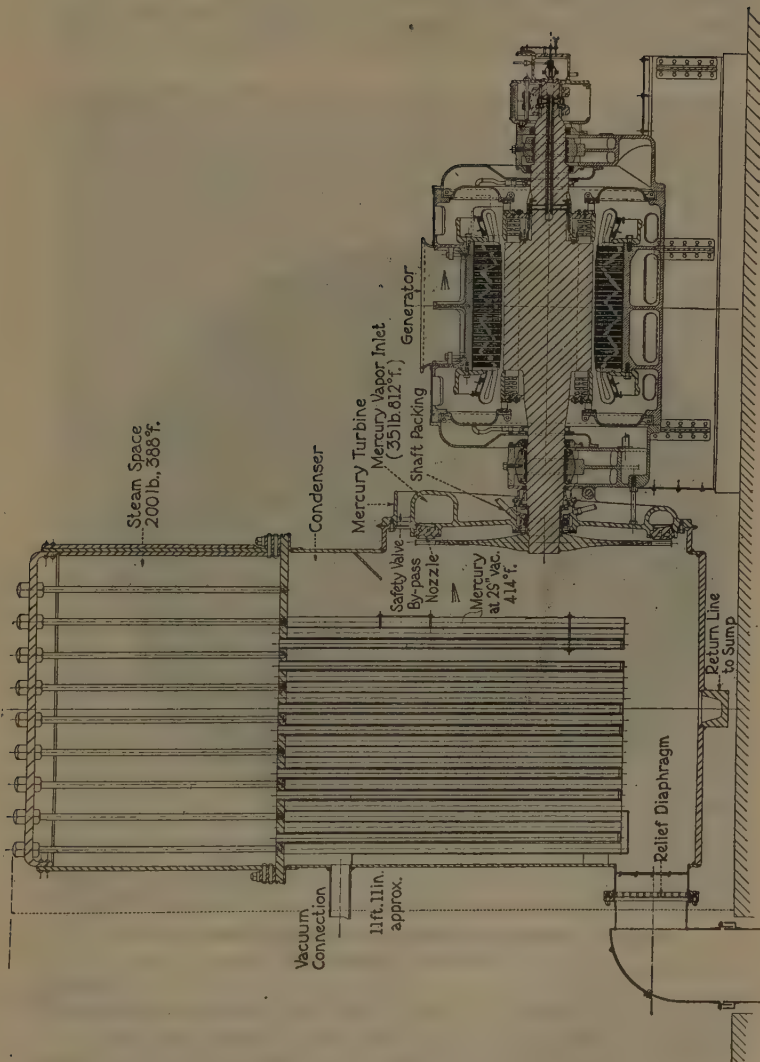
SECTION THROUGH MERCURY CONDENSER, TURBINE, AND GENERATOR
